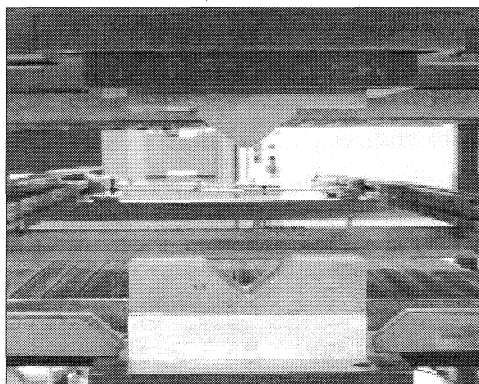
Photograph of the right angle V-tool used for two-dimensional forming.
